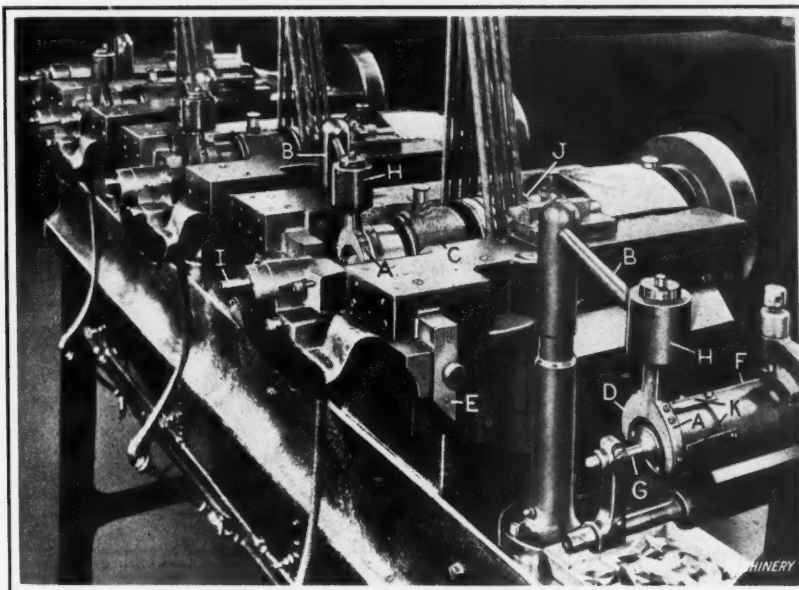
Three-spindle Plate Roughing Machine for surfacing Watch Plates
